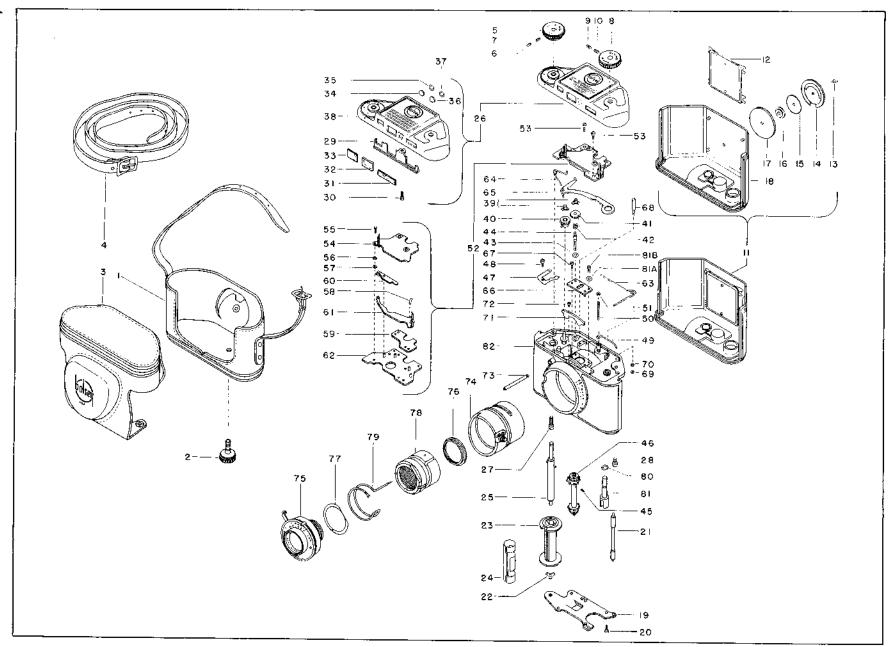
Exploded View, Camera, Ground, 35 Millimeter, Bolsey Model B2
